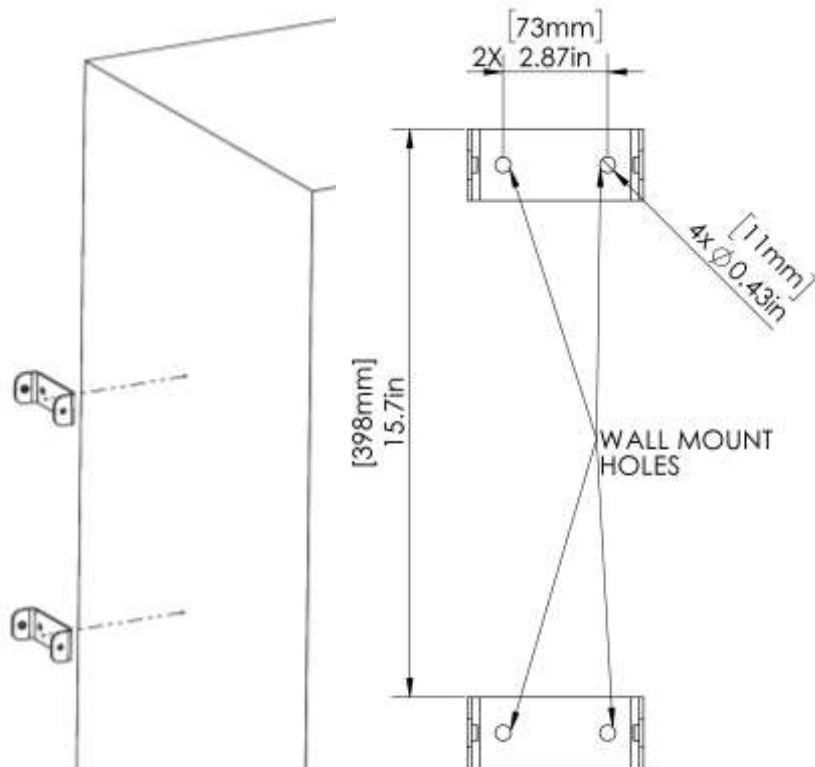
WALL MOUNT BRACKETS, DX10 assembled to a wall.
